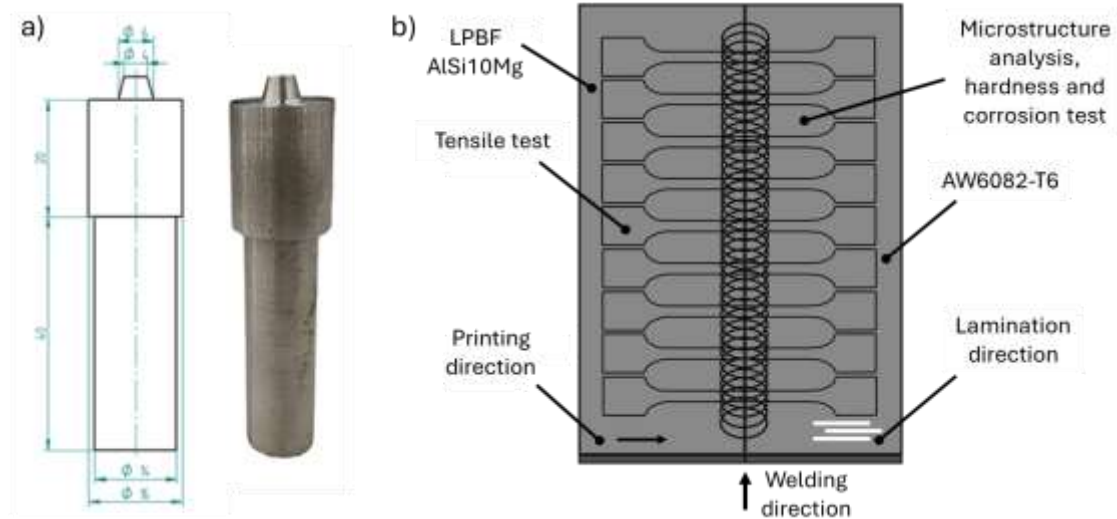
(a) Traditional C40 tool geometry and (b) specimen layout on FSW welded sheet.
